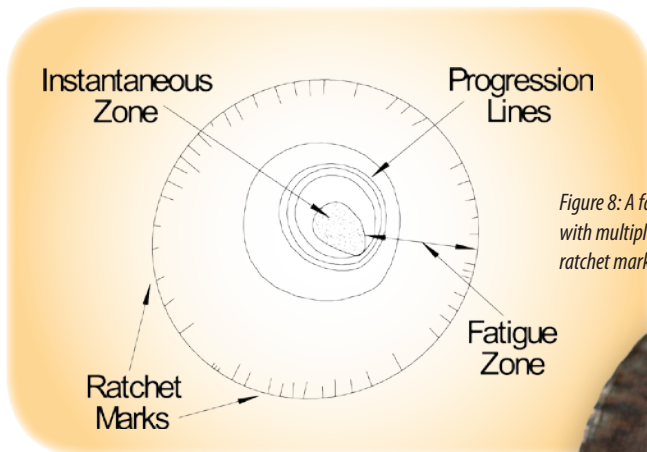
A fatigue fracture with multiple origins and ratchet marks
